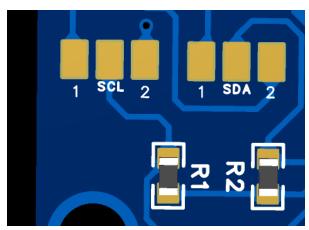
Solder Pads for 12C SCL and SDA Jumpers
